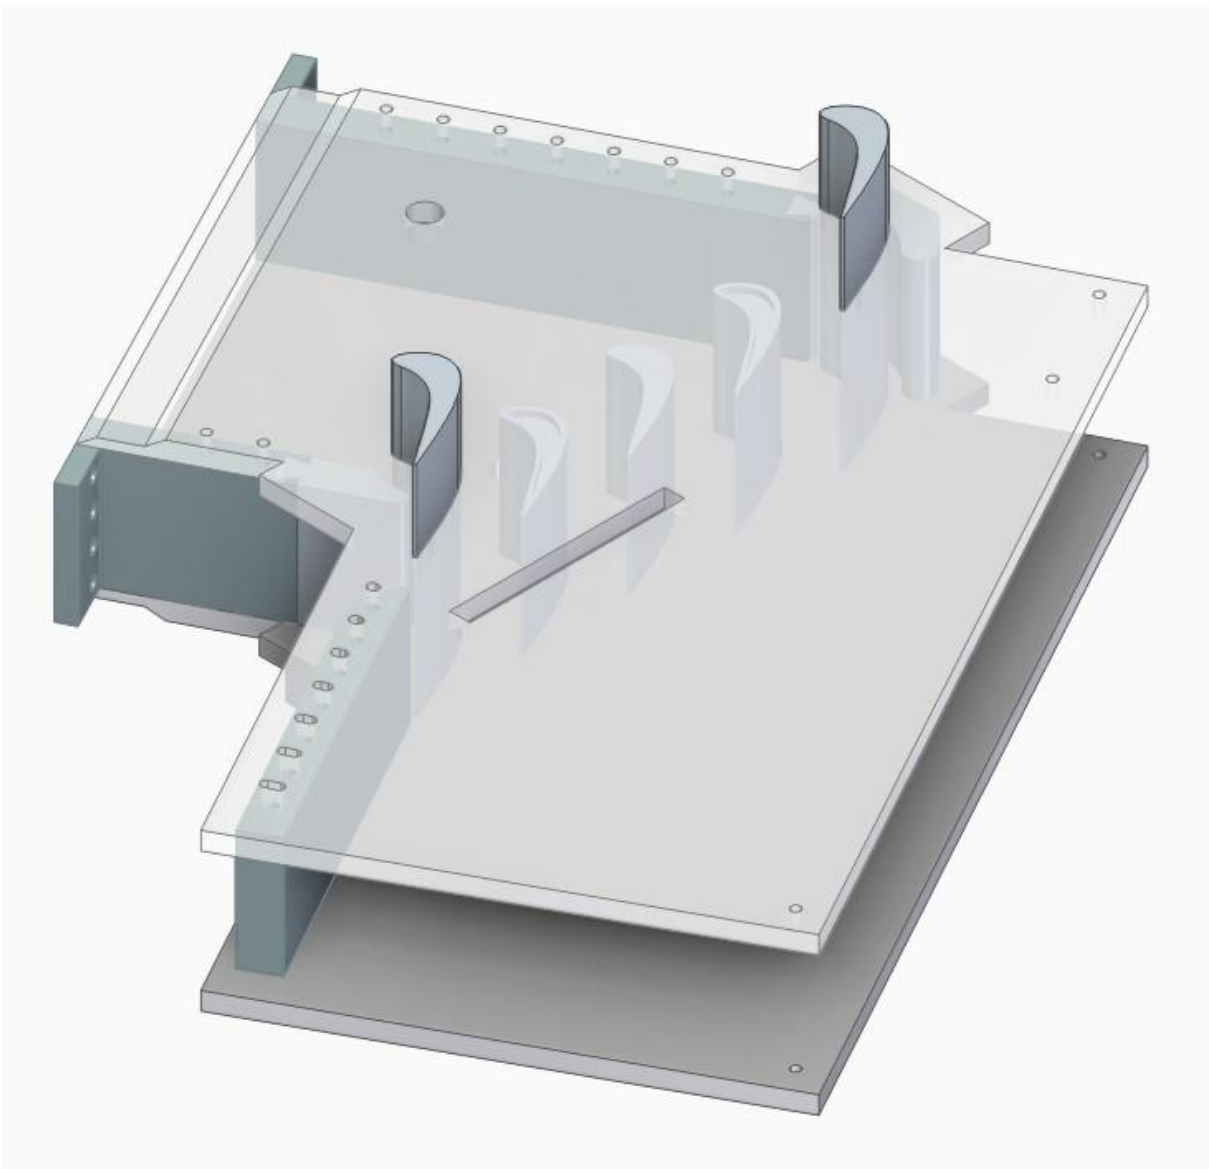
Three-dimensional isometric view of the linear cascade assembly at the exit.
